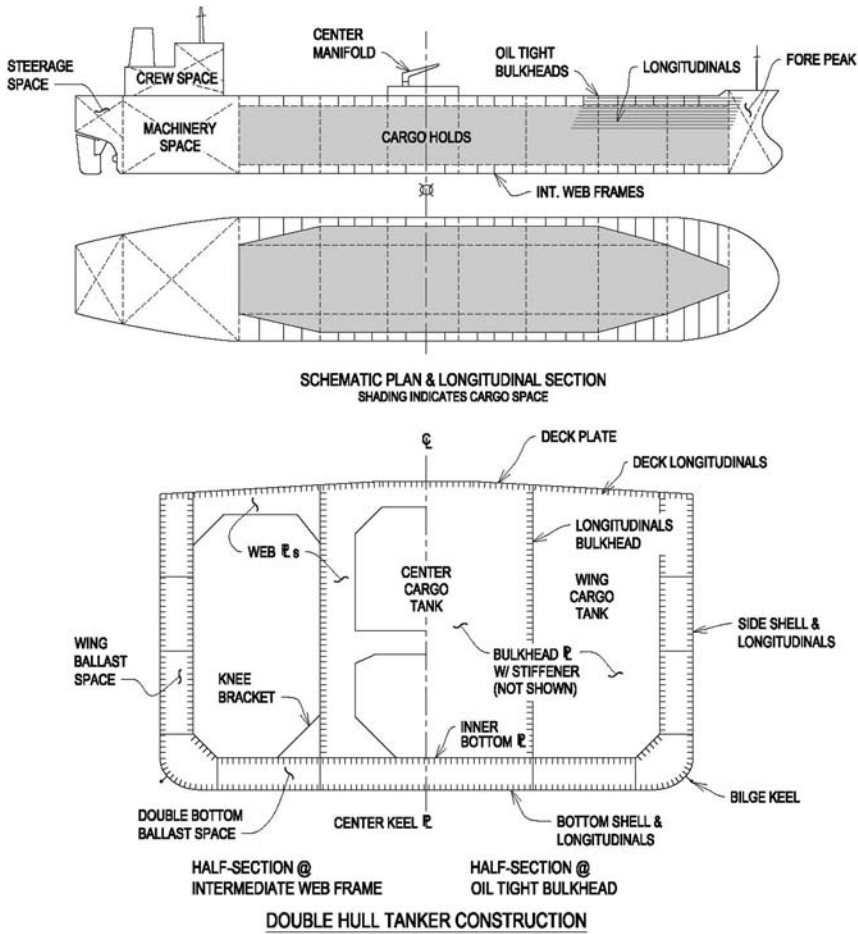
Double-hull tanker schematic framing plan and sections
